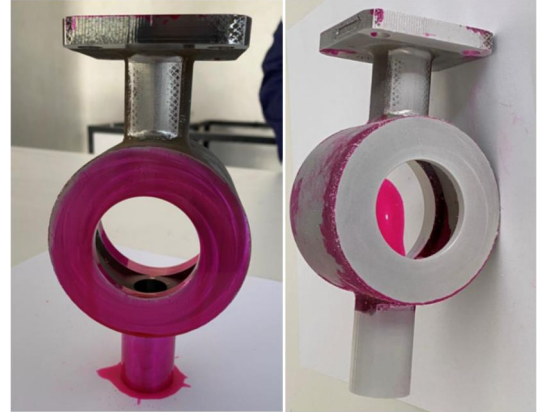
PT TEST ON MACHINED SURFACE OF THE VALVES
